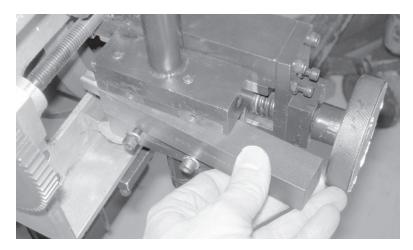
Remove the tool holder cover and insert the tool holder into the slide.
